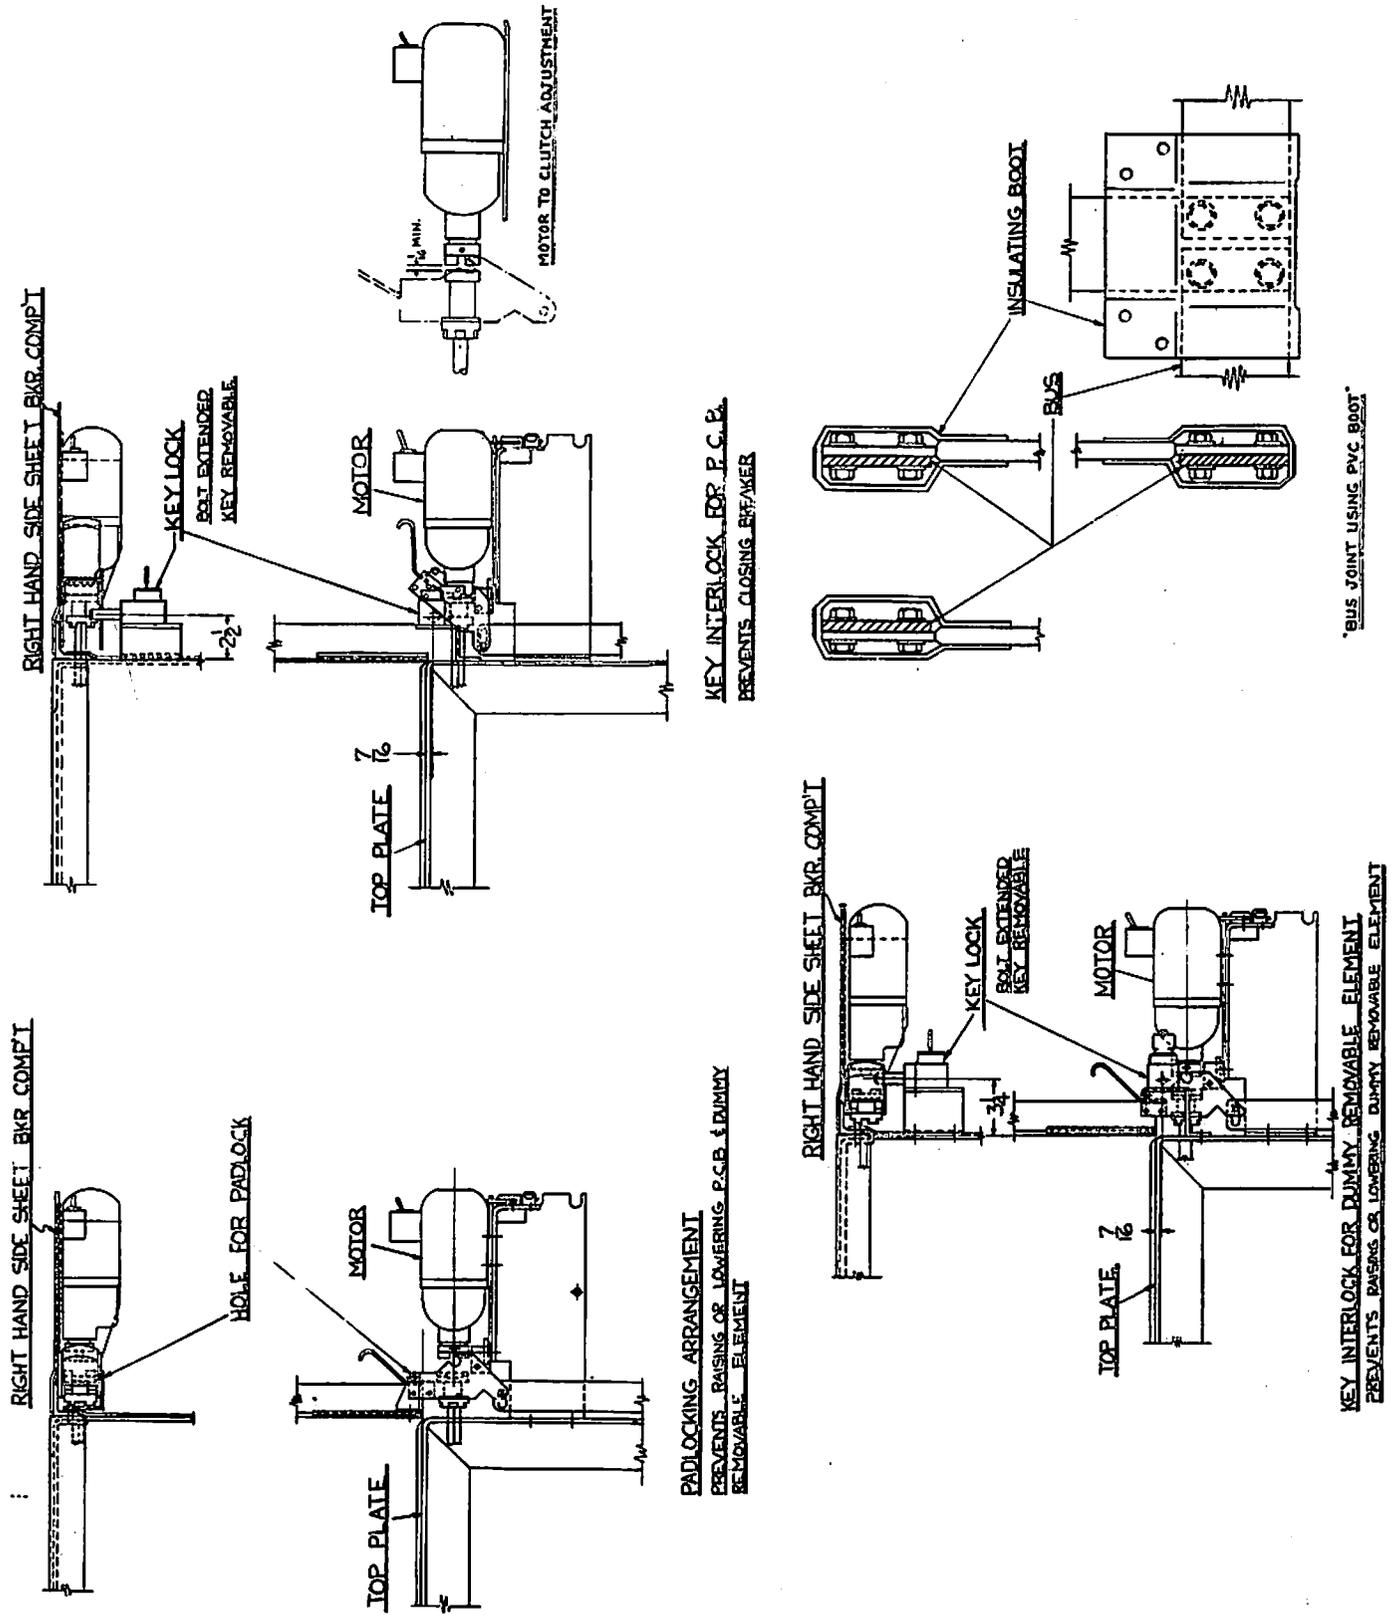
Padlocking Arrangement, Key Interlocking and Bus Boot Assembly
